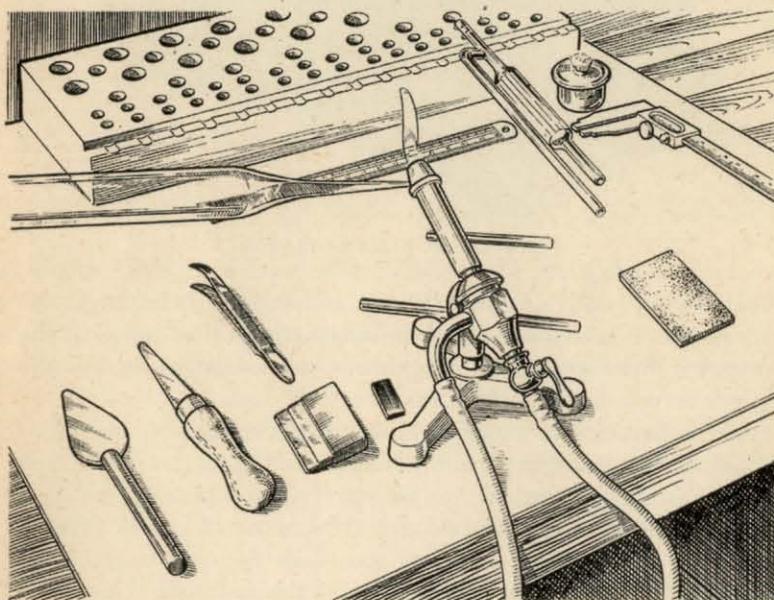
THE GLASSBLOWER'S BENCH
